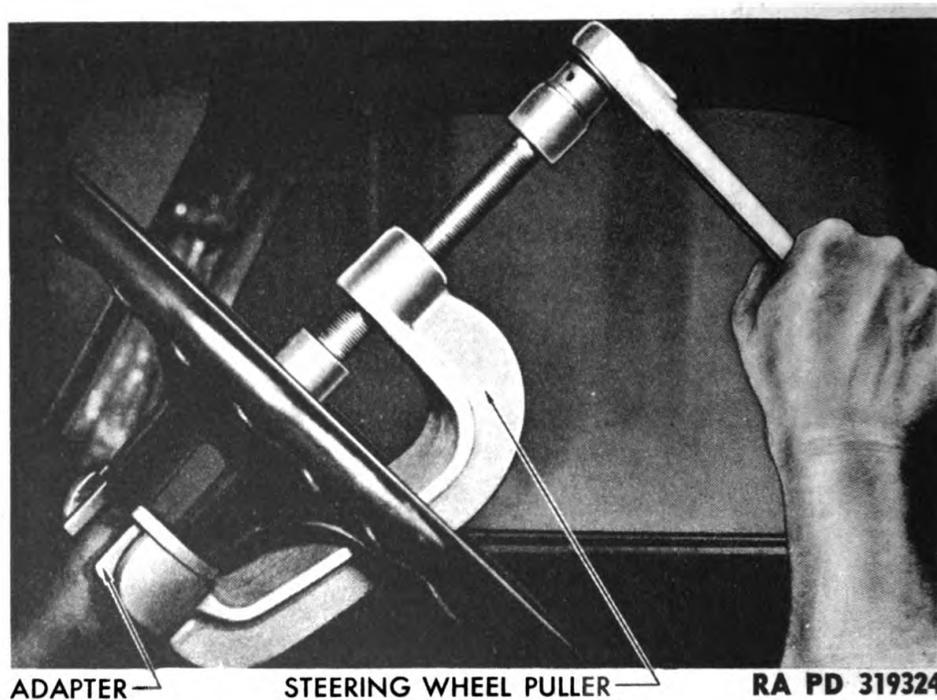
Removing Steering Wheel With Puller 41-P-2954
